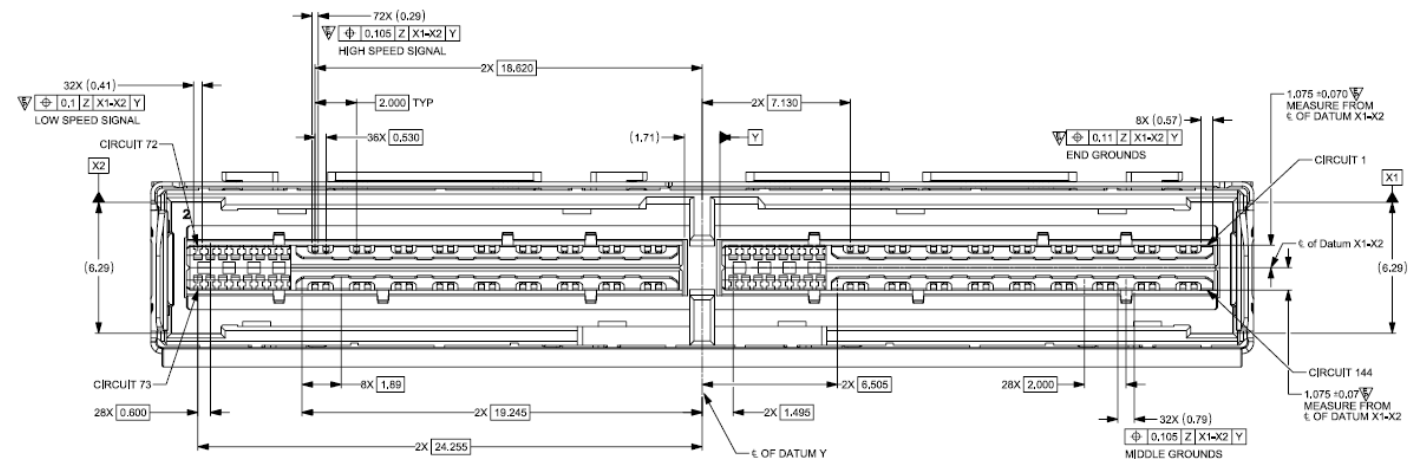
Dual-Bay Top View of Fixed-Side Connector
